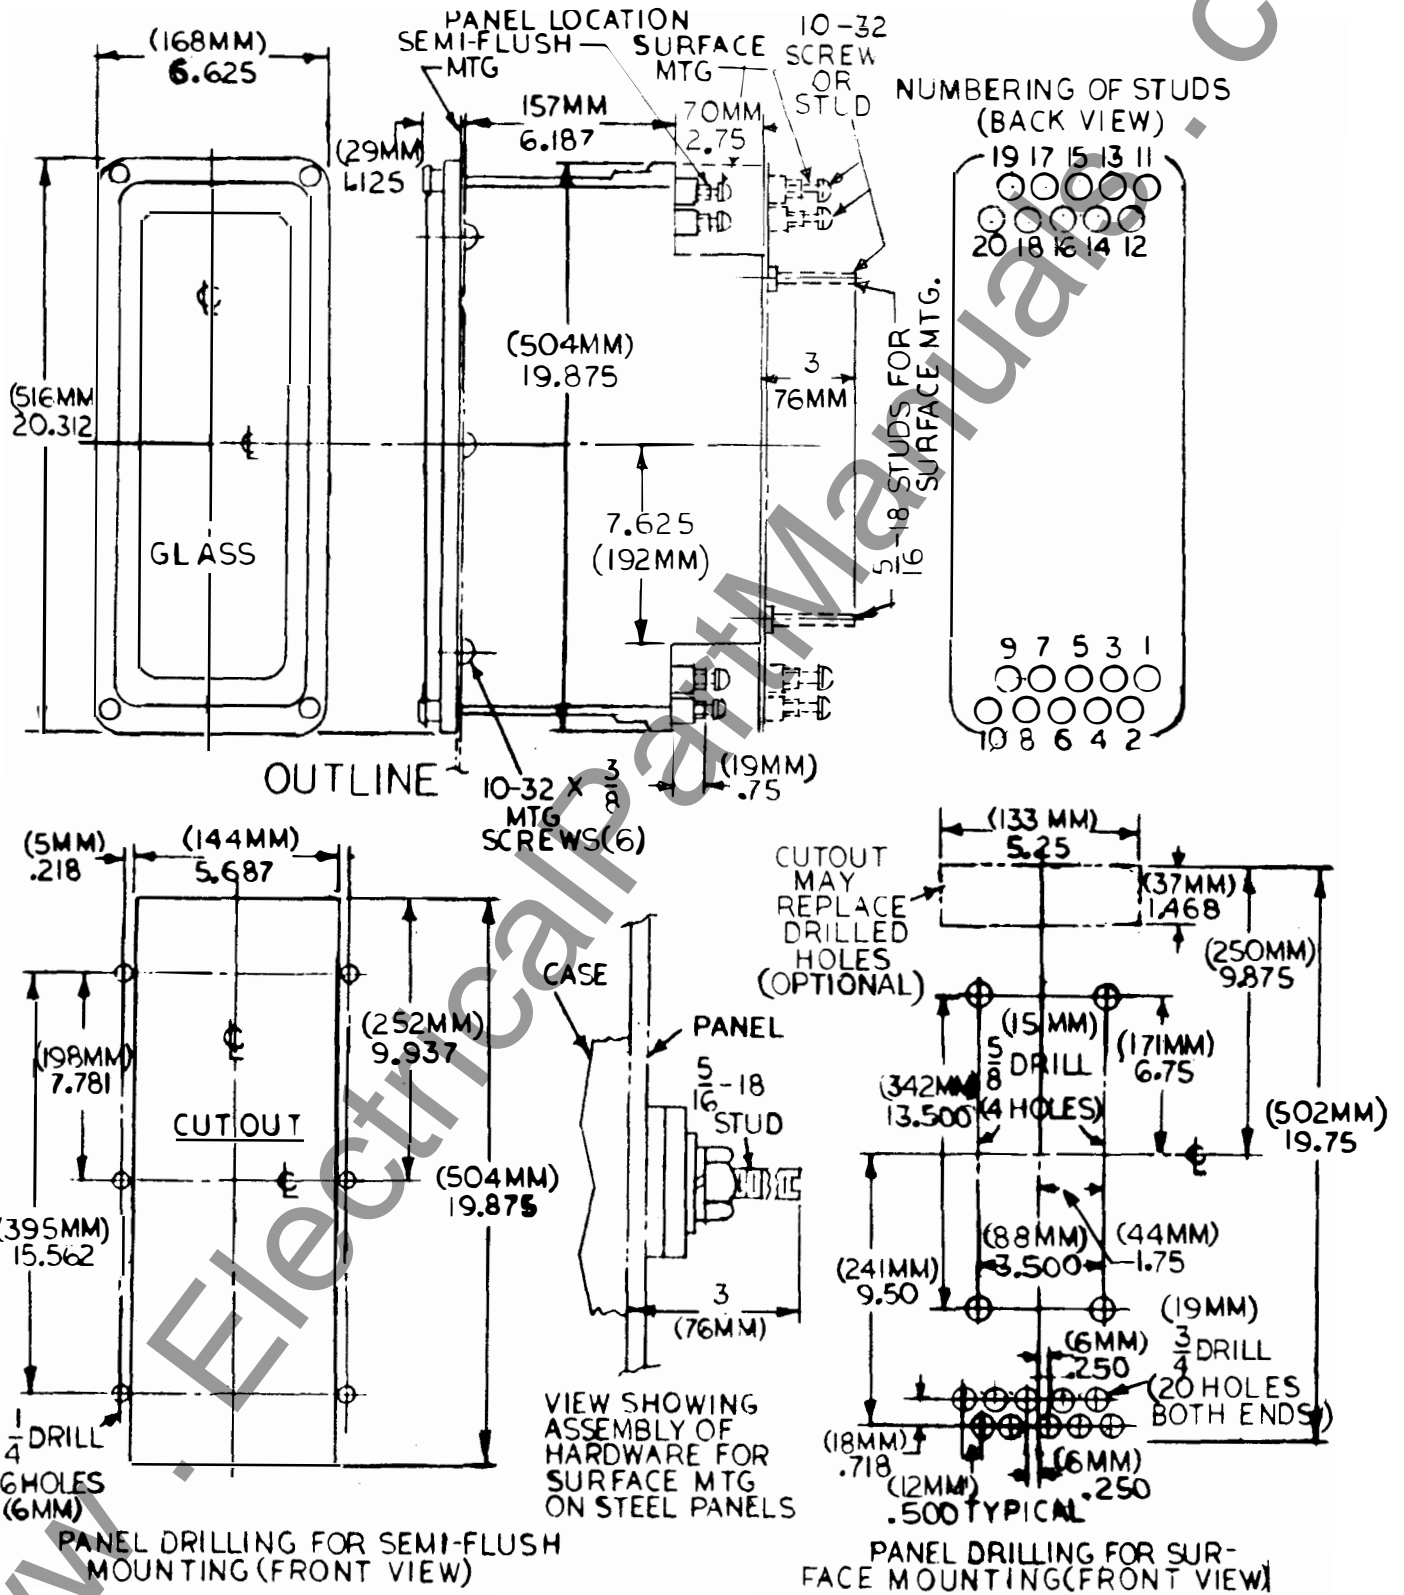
(0178A7336-4) Outline and Panel Drilling for Type SLYG81A Relay
